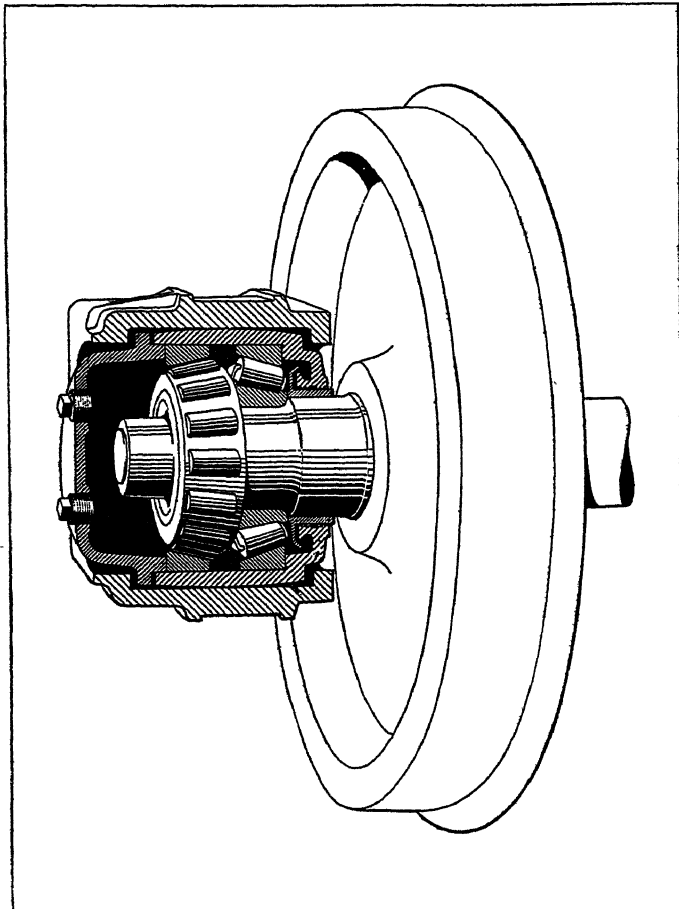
CROSS SECTION VIEW OF TIMKEN TAPERED BEARING APPLICATION FOR RAILWAY PASSENGER EQUIPMENT. THIS BEARING CAN TAKE THRUST LOADS IN EITHER DIRECTION AS WELL AS THE VERTICAL AND RADIAL LOADS AND CAN BE ADJUSTED FOR ANY WEAR WHICH MAY OCCUR
